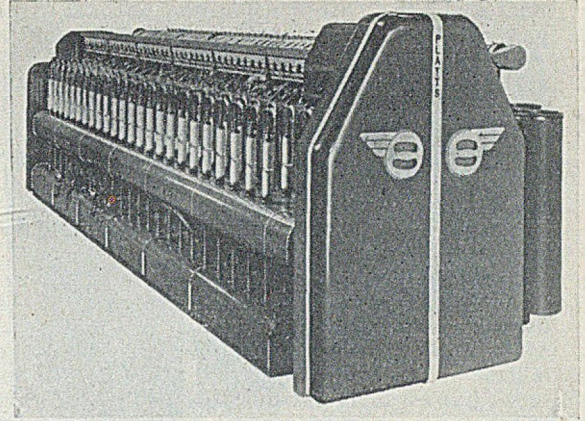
Flyer-frame Machine which produces a Coarse Twisted Thread from a Number of "Slivers."
